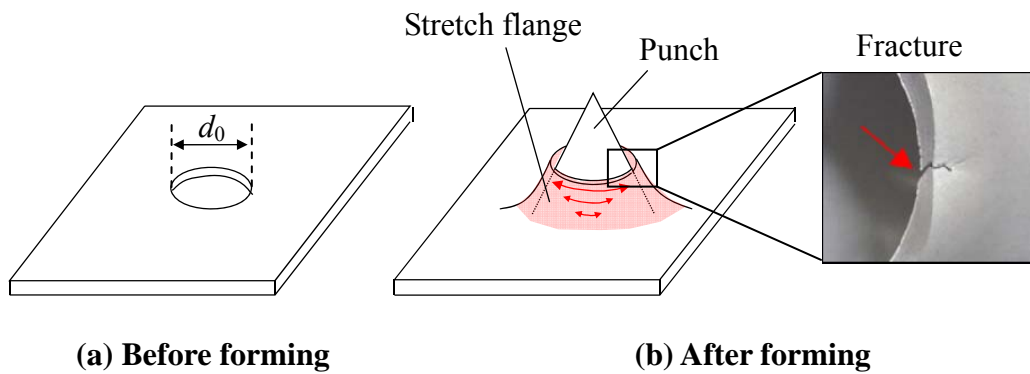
Schematic drawing of geometry for hole expansion test.
